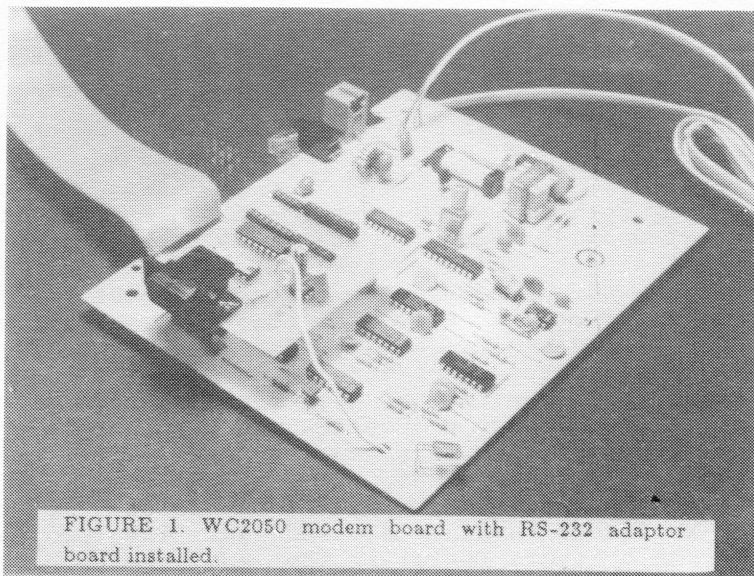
WC2050 modem board with RS-232 adaptor board installed.
